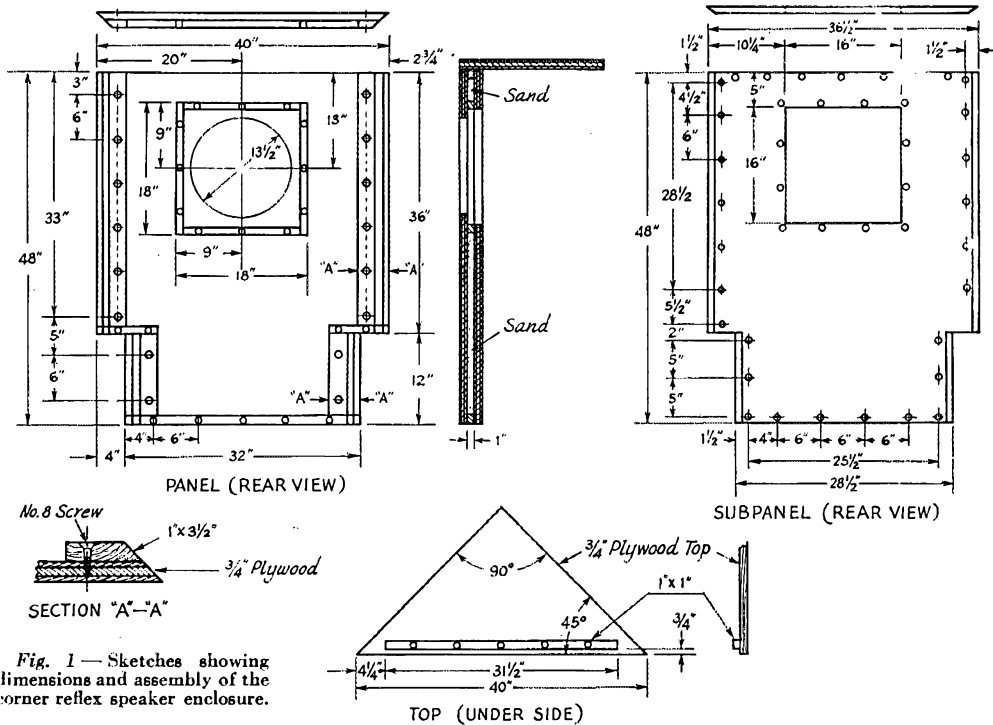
Sketches showing dimensions and assembly of the corner reflex speaker enclosure.
